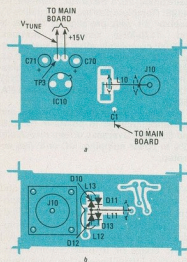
CAPACITORS AND IC10 are mounted on bottom of mixer board (a); diodes on top (b).
